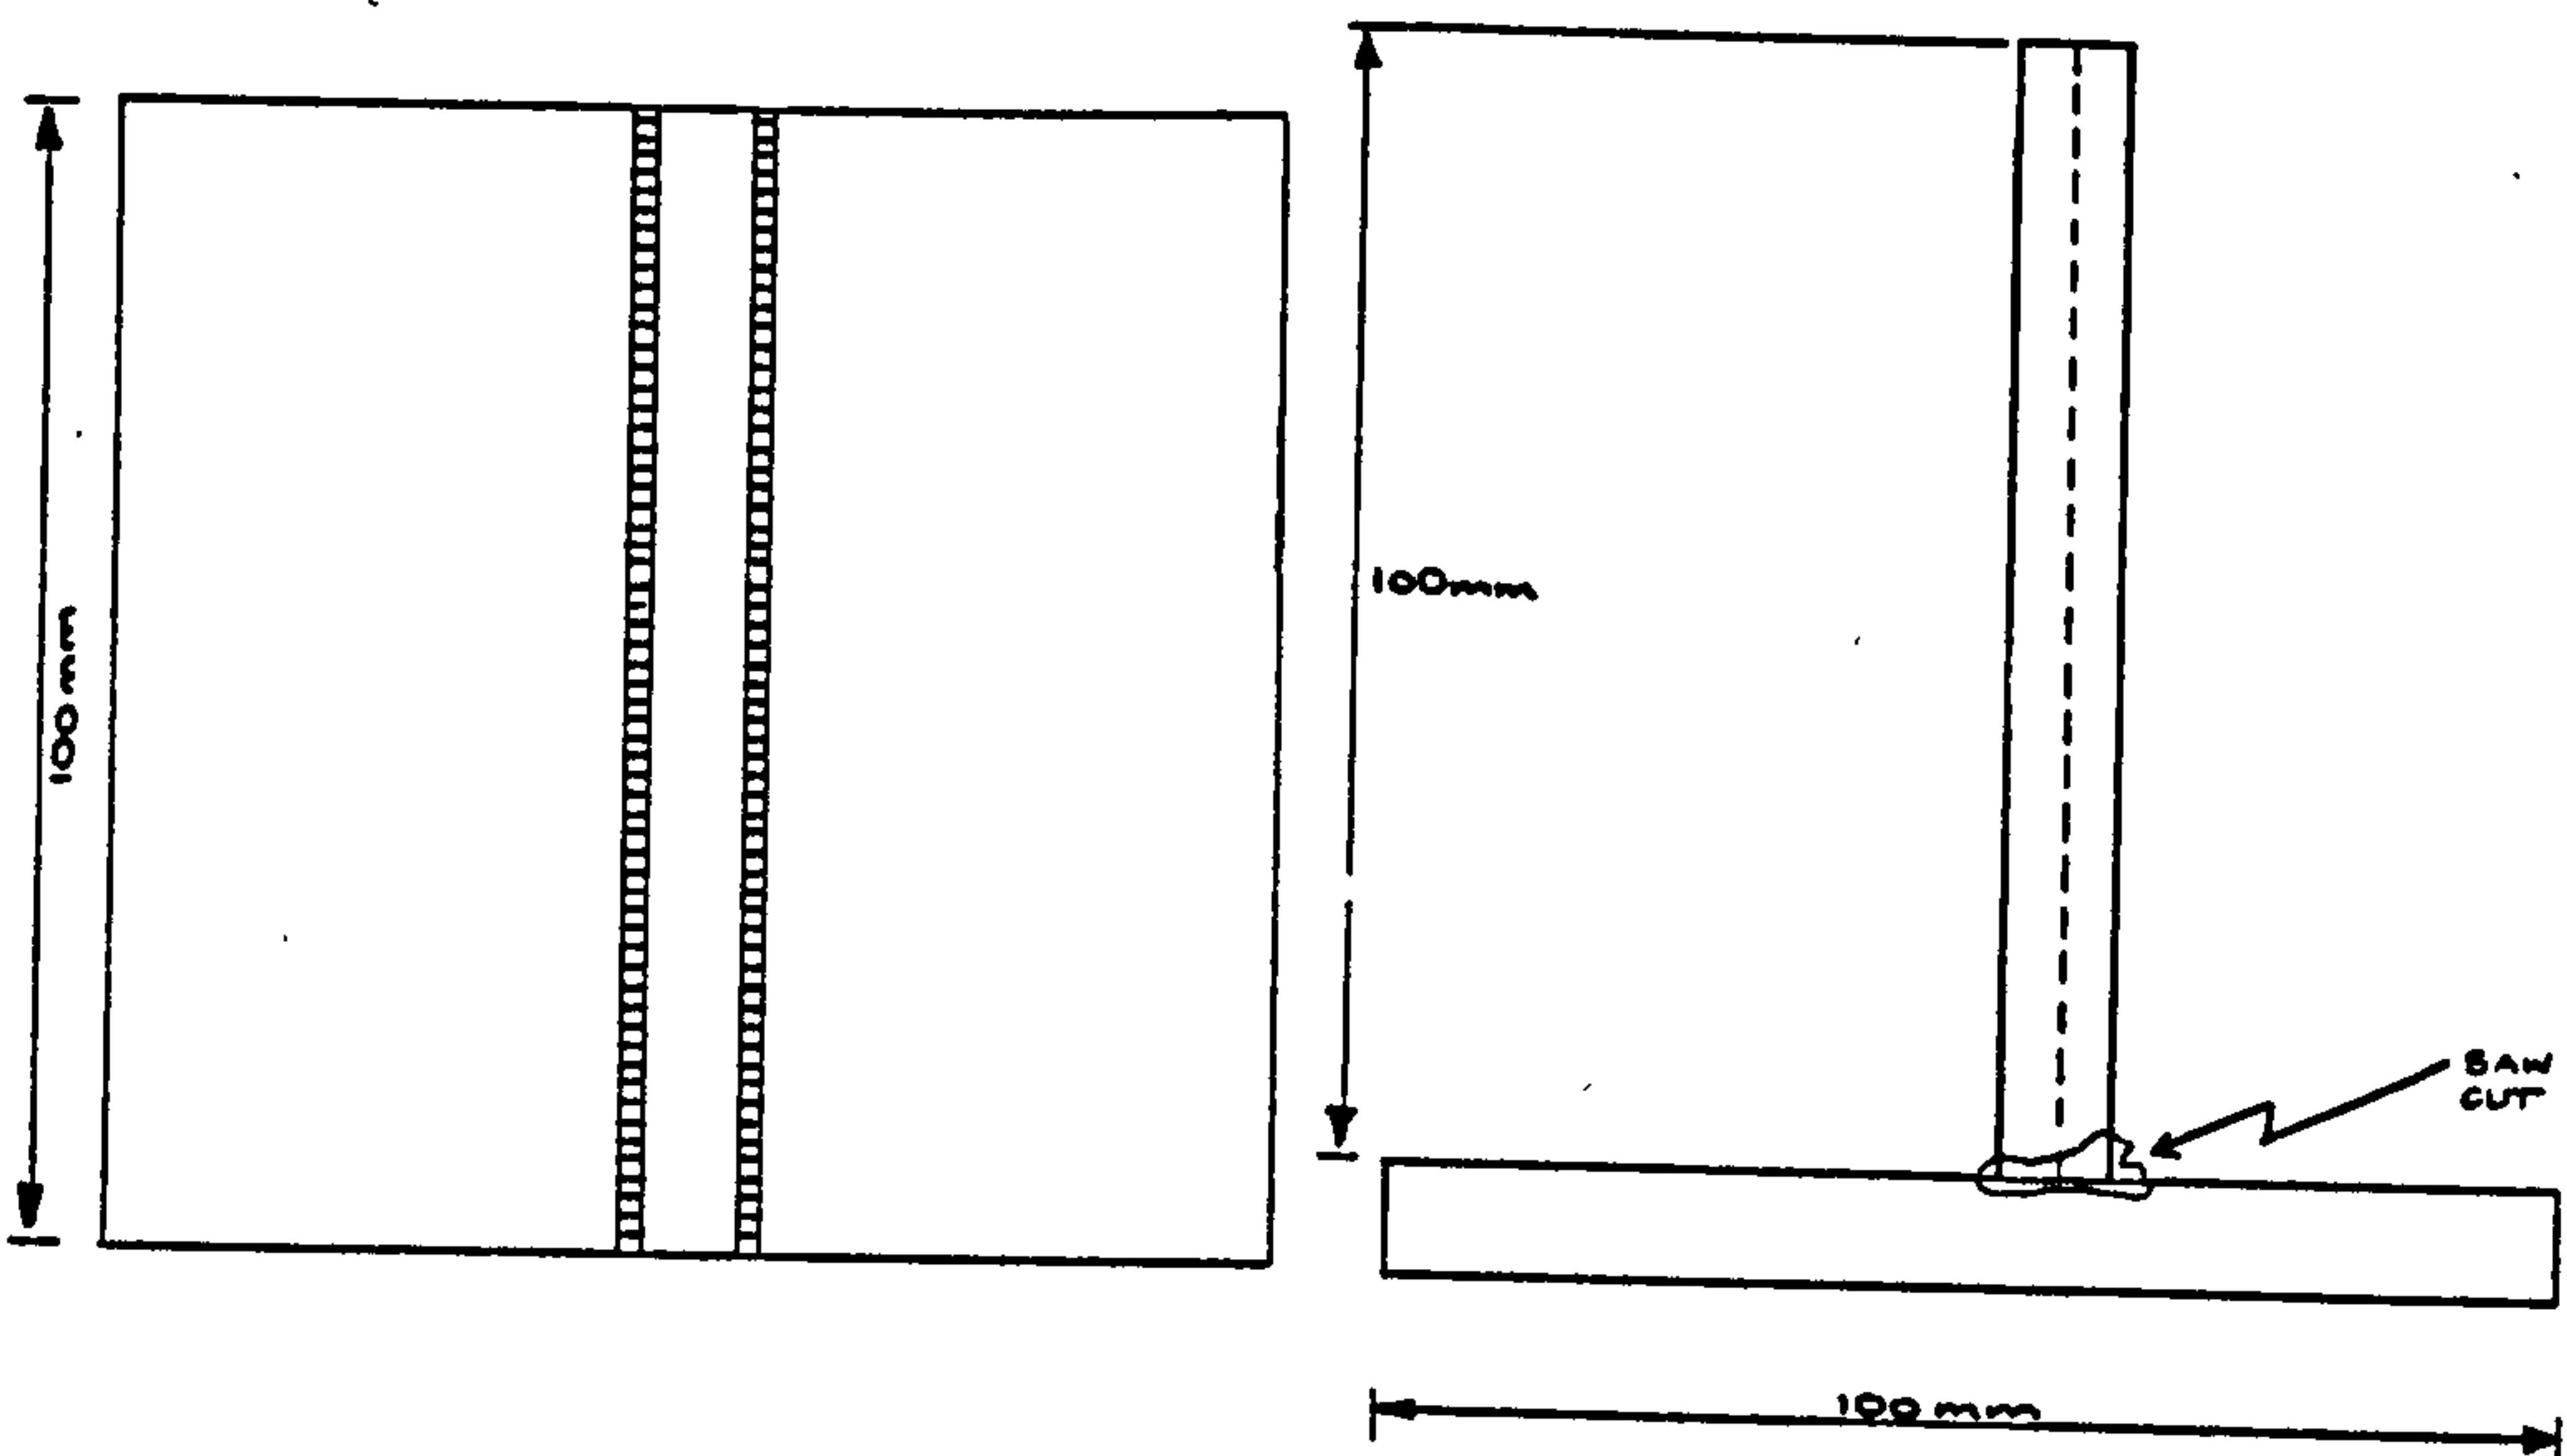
Dimensions of the samples used for fillet fracture type testing
